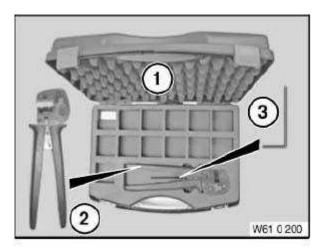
Identifying Crimping Stop Parts (Small Contacts) Courtesy of BMW OF NORTH AMERICA, INC.
